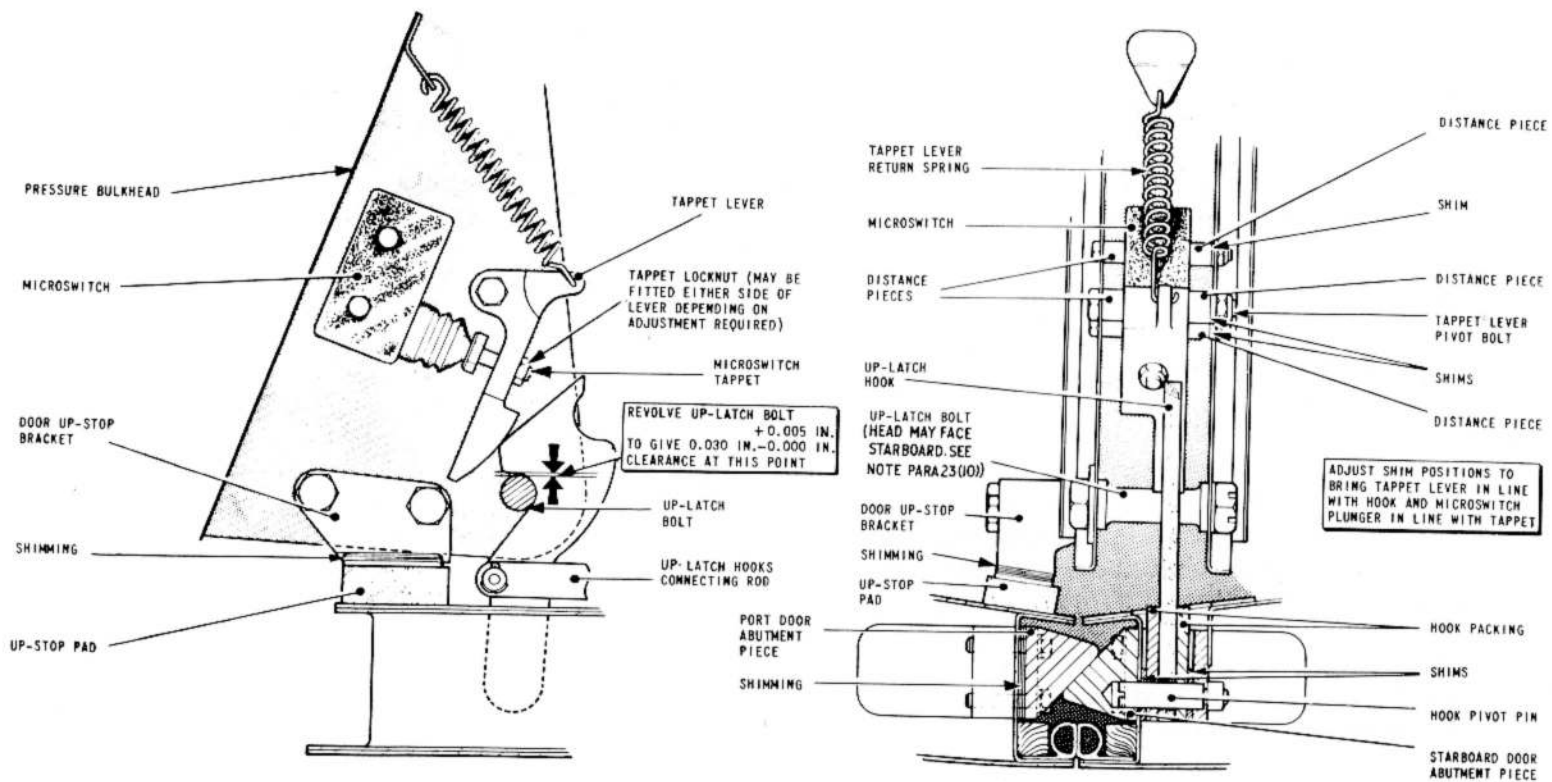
DOOR FORWARD UP-LATCH HOOK SETTING
